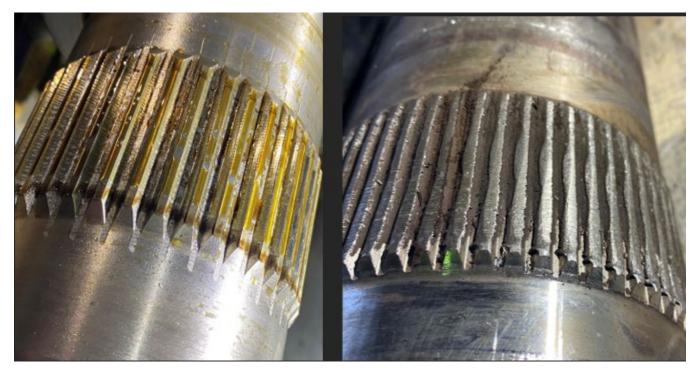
Undamaged handrail-shaft splines (Left) Damaged step-drive main-shaft splines (Right)
